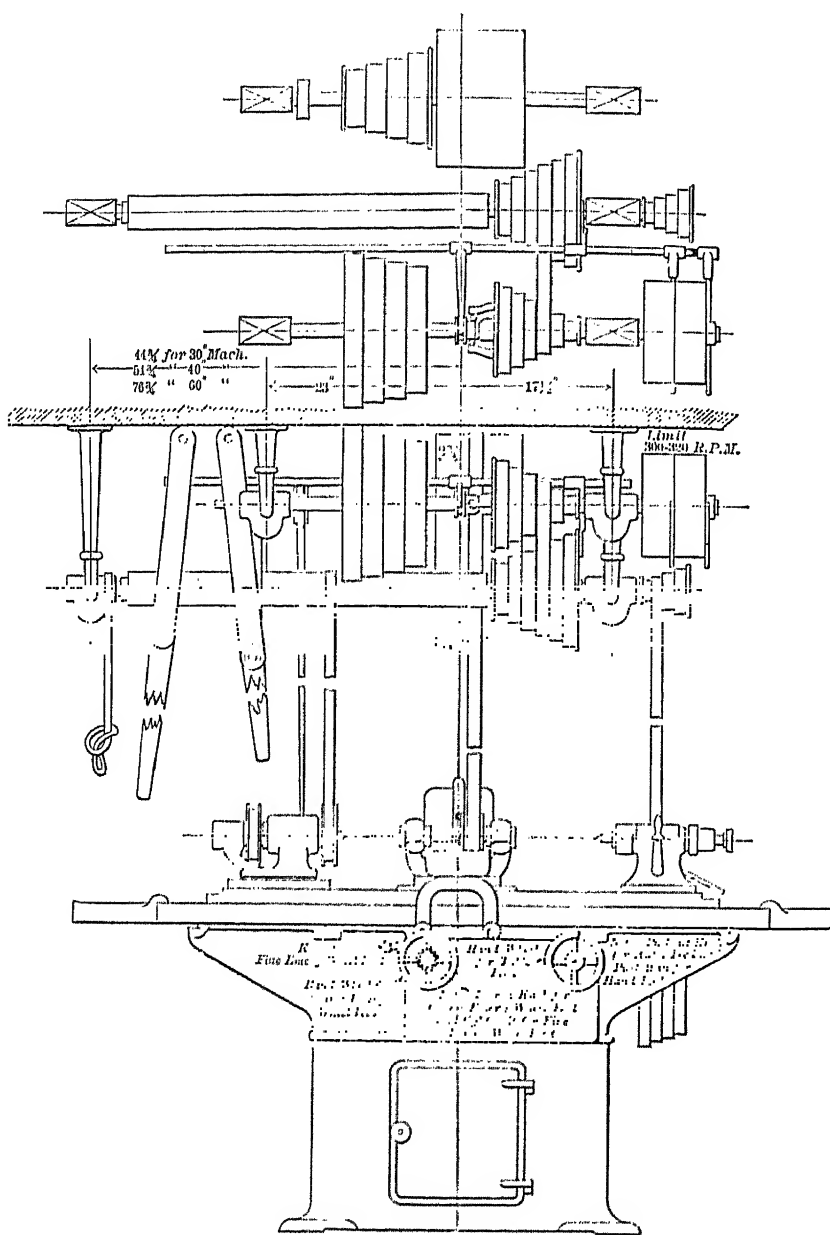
C.—Universal grinding machine, showing overhead arrangement.
